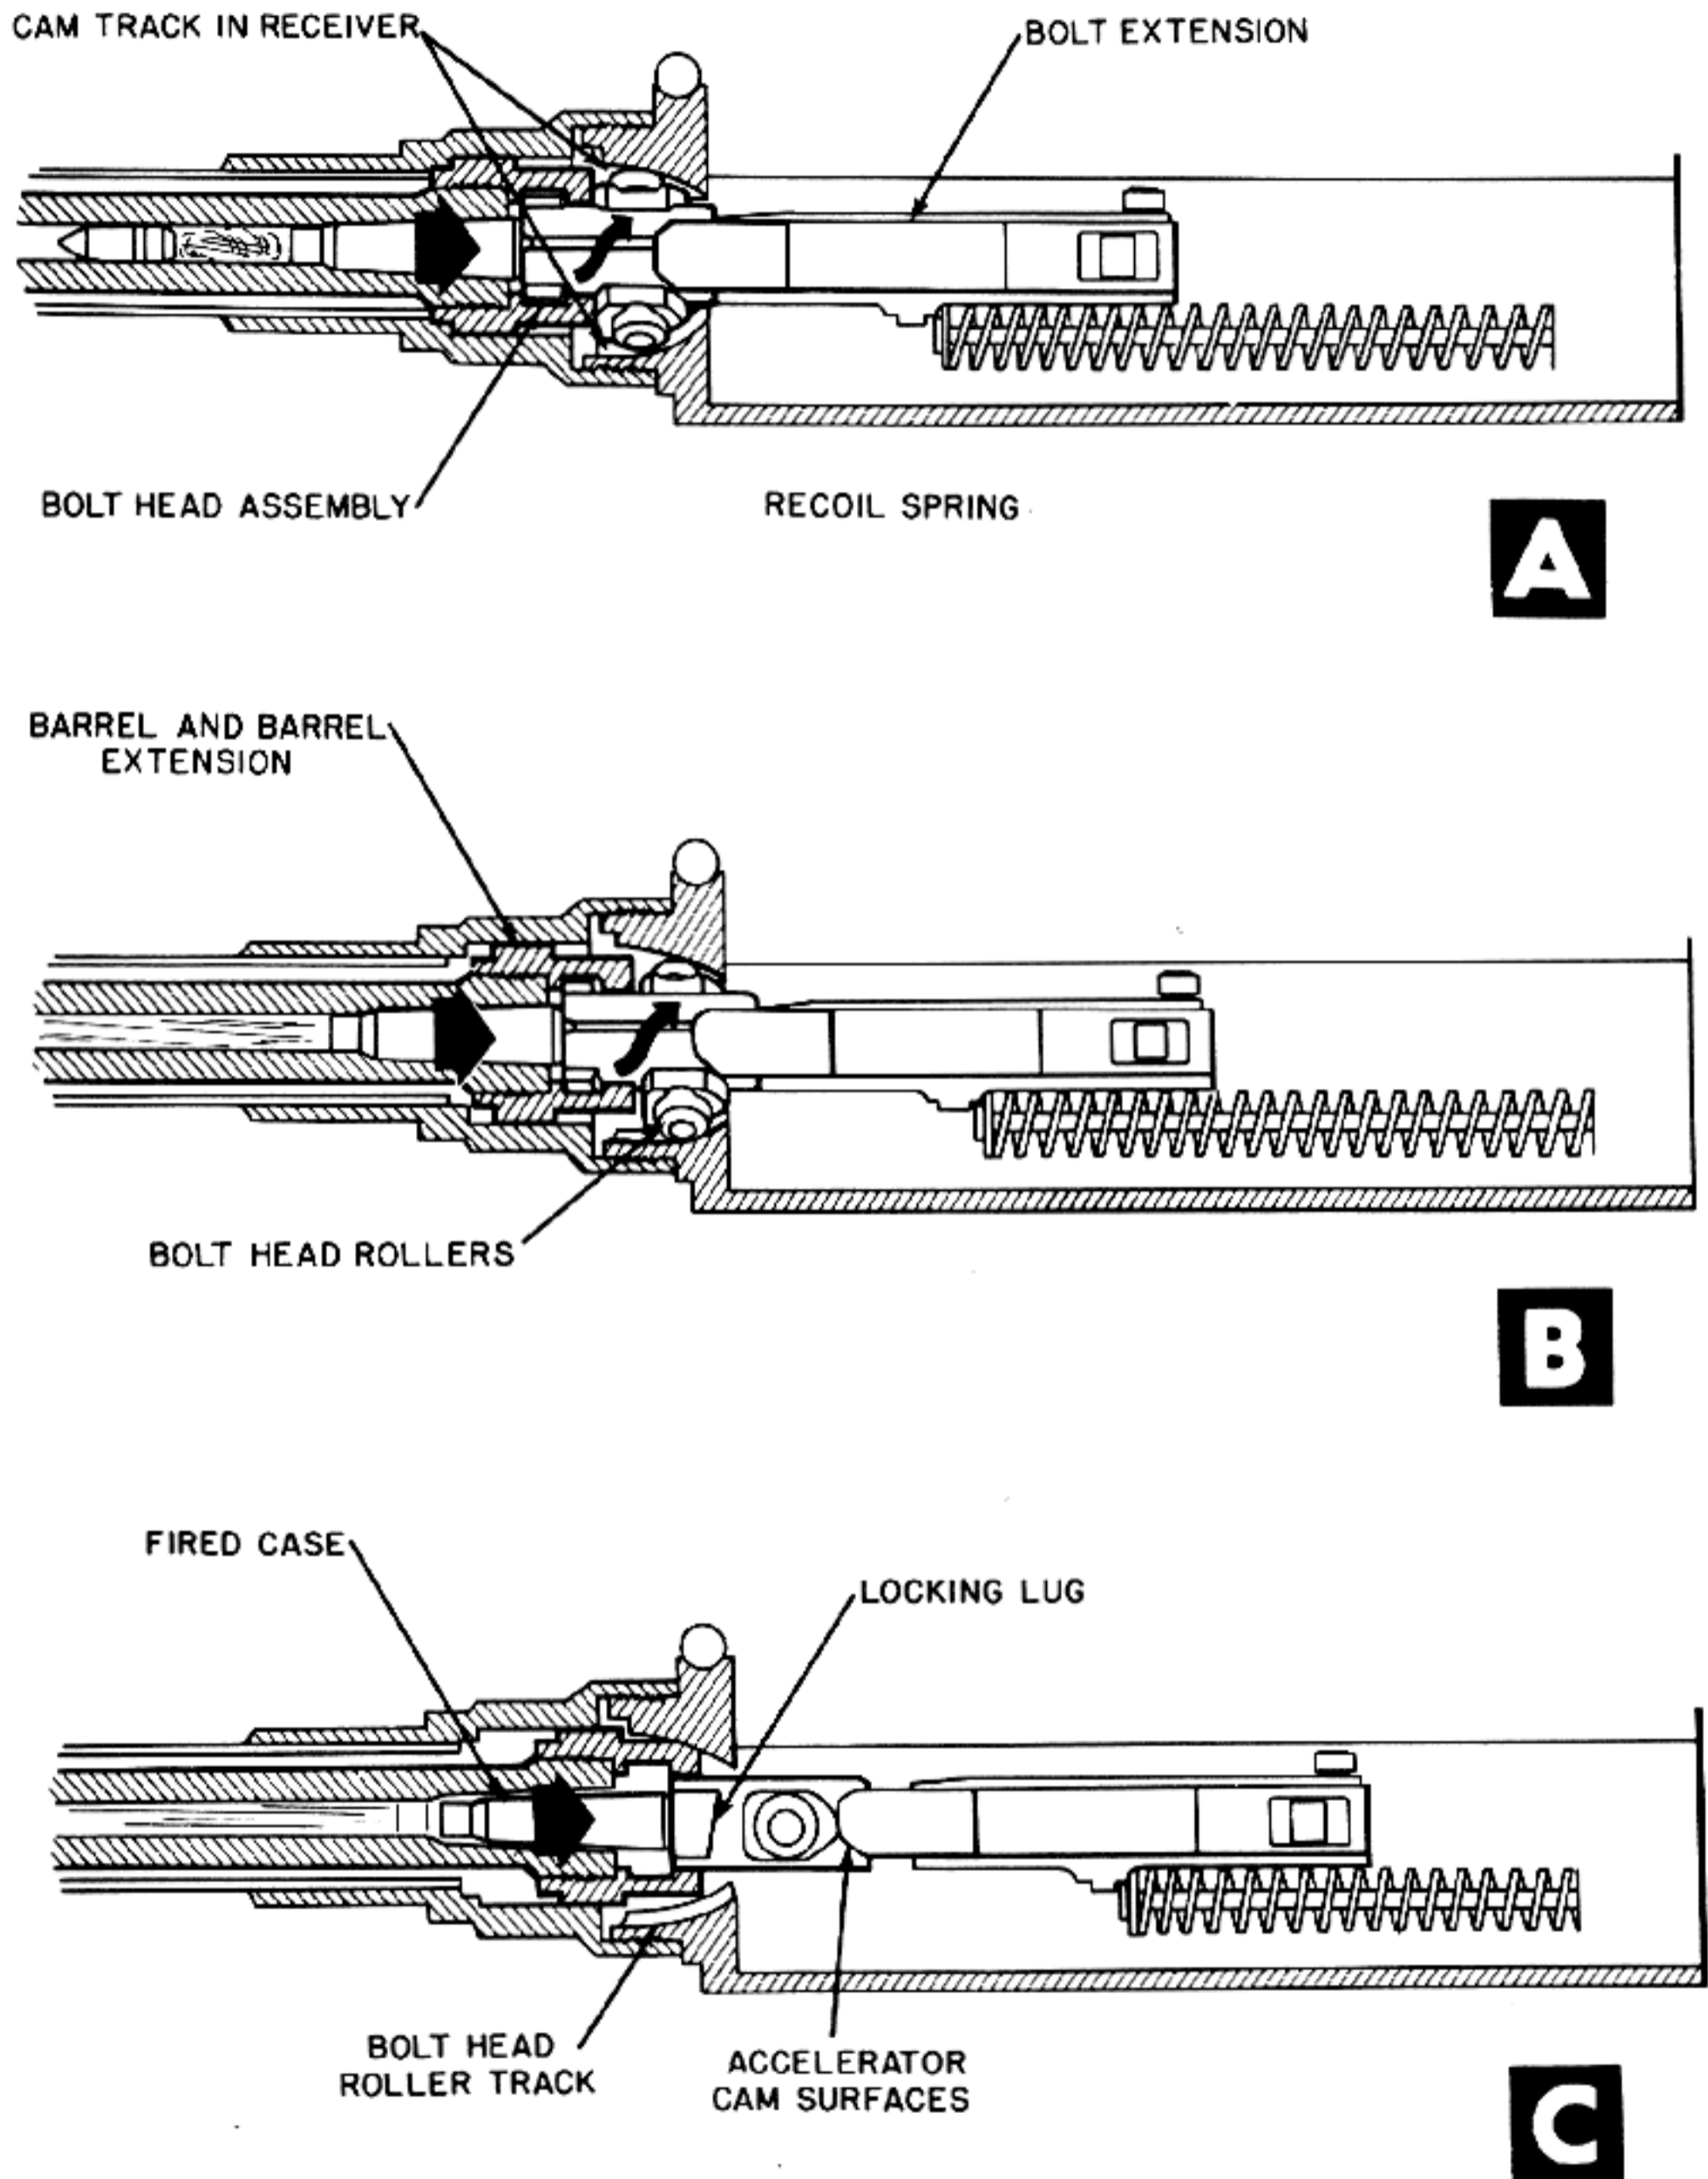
Cam Grooves on the Receiver Force Recoiling Bolt to Rotate to Unlock Position.
